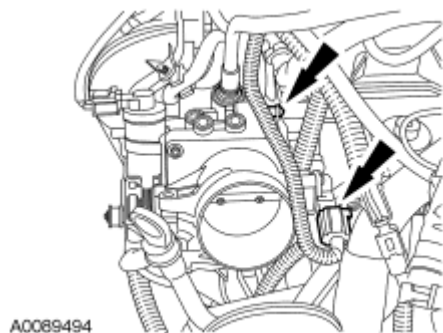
Locating Throttle Position Sensor Electrical Connector And Wiring Harness Pin-Type Retainer
